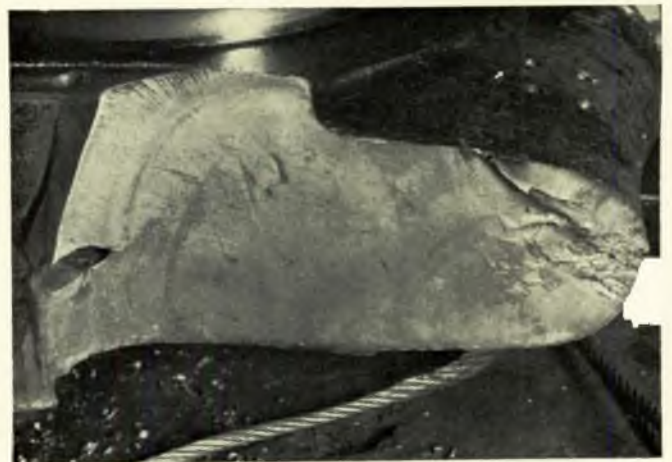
Fracture section through cast steel fully built crankweb (Case VII)
